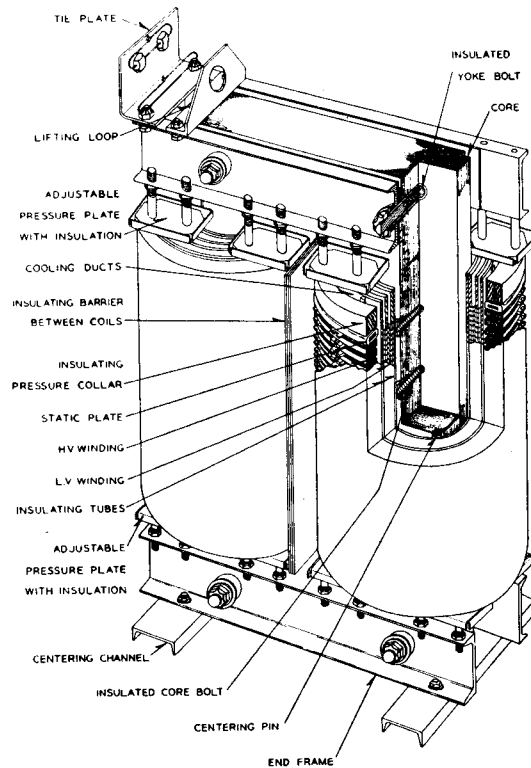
SECTIONAL VIEW OF A SINGLE PHASE CORE FORM TRANSFORMER
